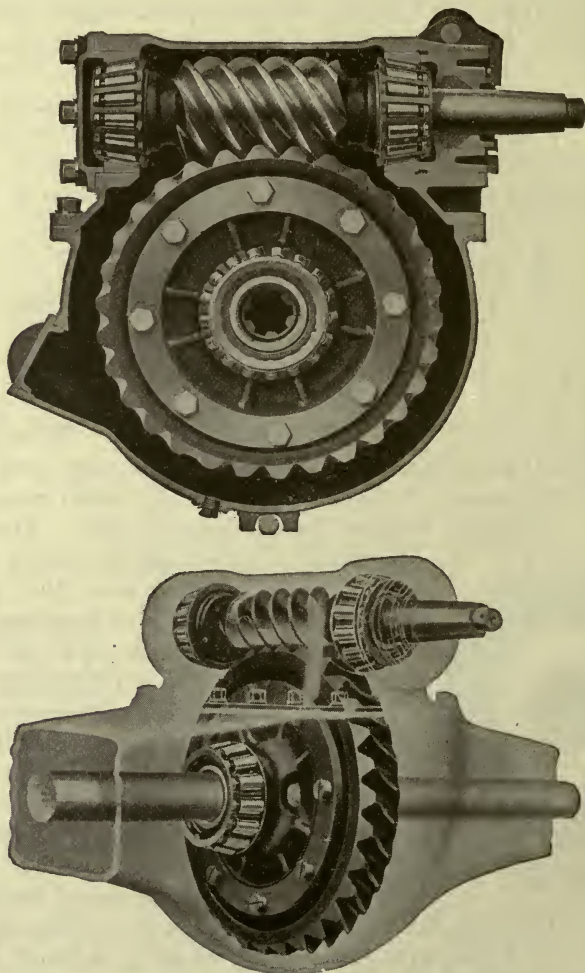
Two views of Worm and Gear as used in Truck Axle Drive.
